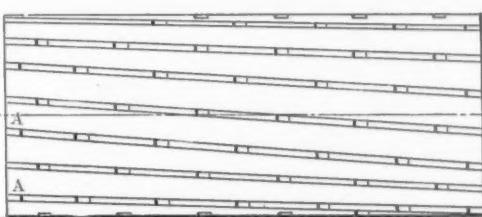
MILLING CUTTER WITH NICKED TEETH.
